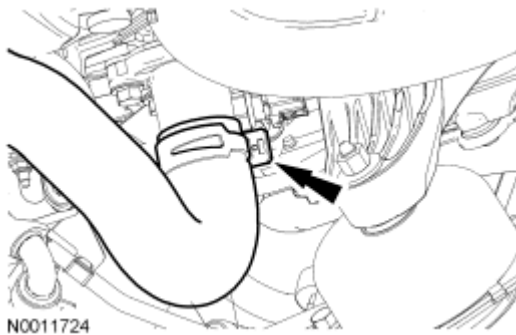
Identifying Coolant Hose On Oil Filter Adapter
